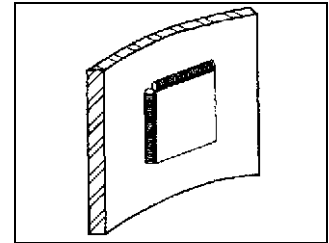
Reinforced pad, seal weld — best crevice resistance
